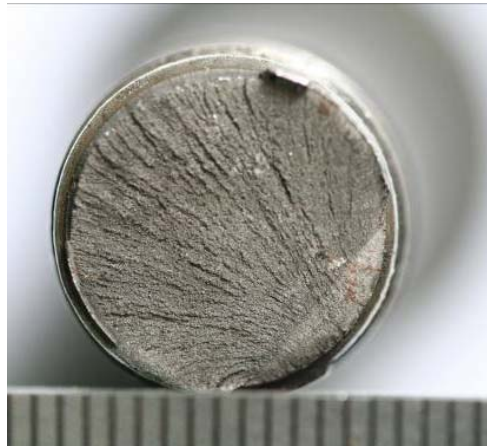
Bolt D: Fracture surface with a fatigue crack of 6mm long (circumferentially).
